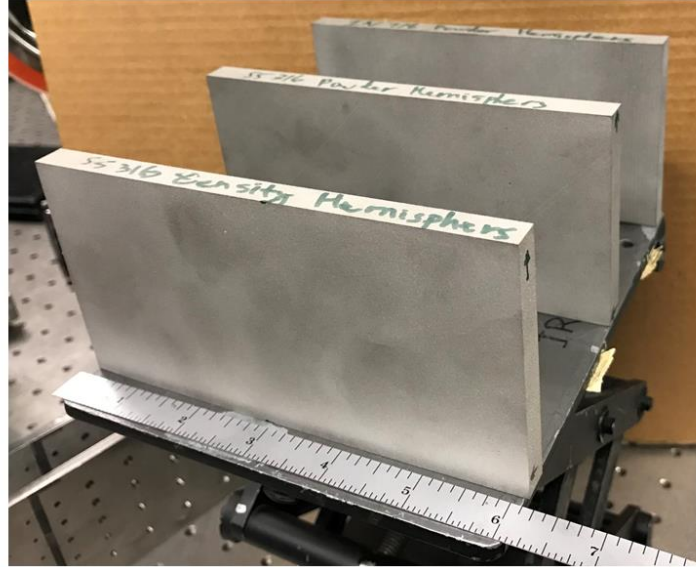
Photograph of two SS-316L and one INC718 plates manufactured with LPBF method
